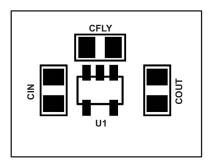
Recommended PCB Layout for TPS6040x-Q1 (Top Layer)
